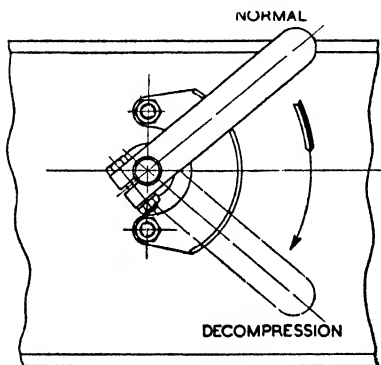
Decompressor on Dorman-Ricardo Engine.
